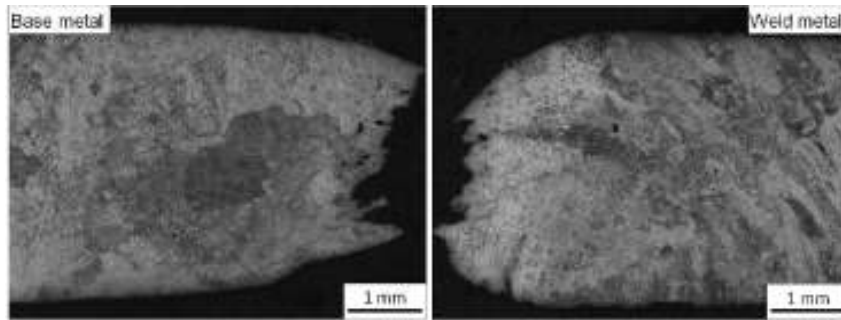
Fracture location of cross-weld specimen 100 MPa, 6,118 h
